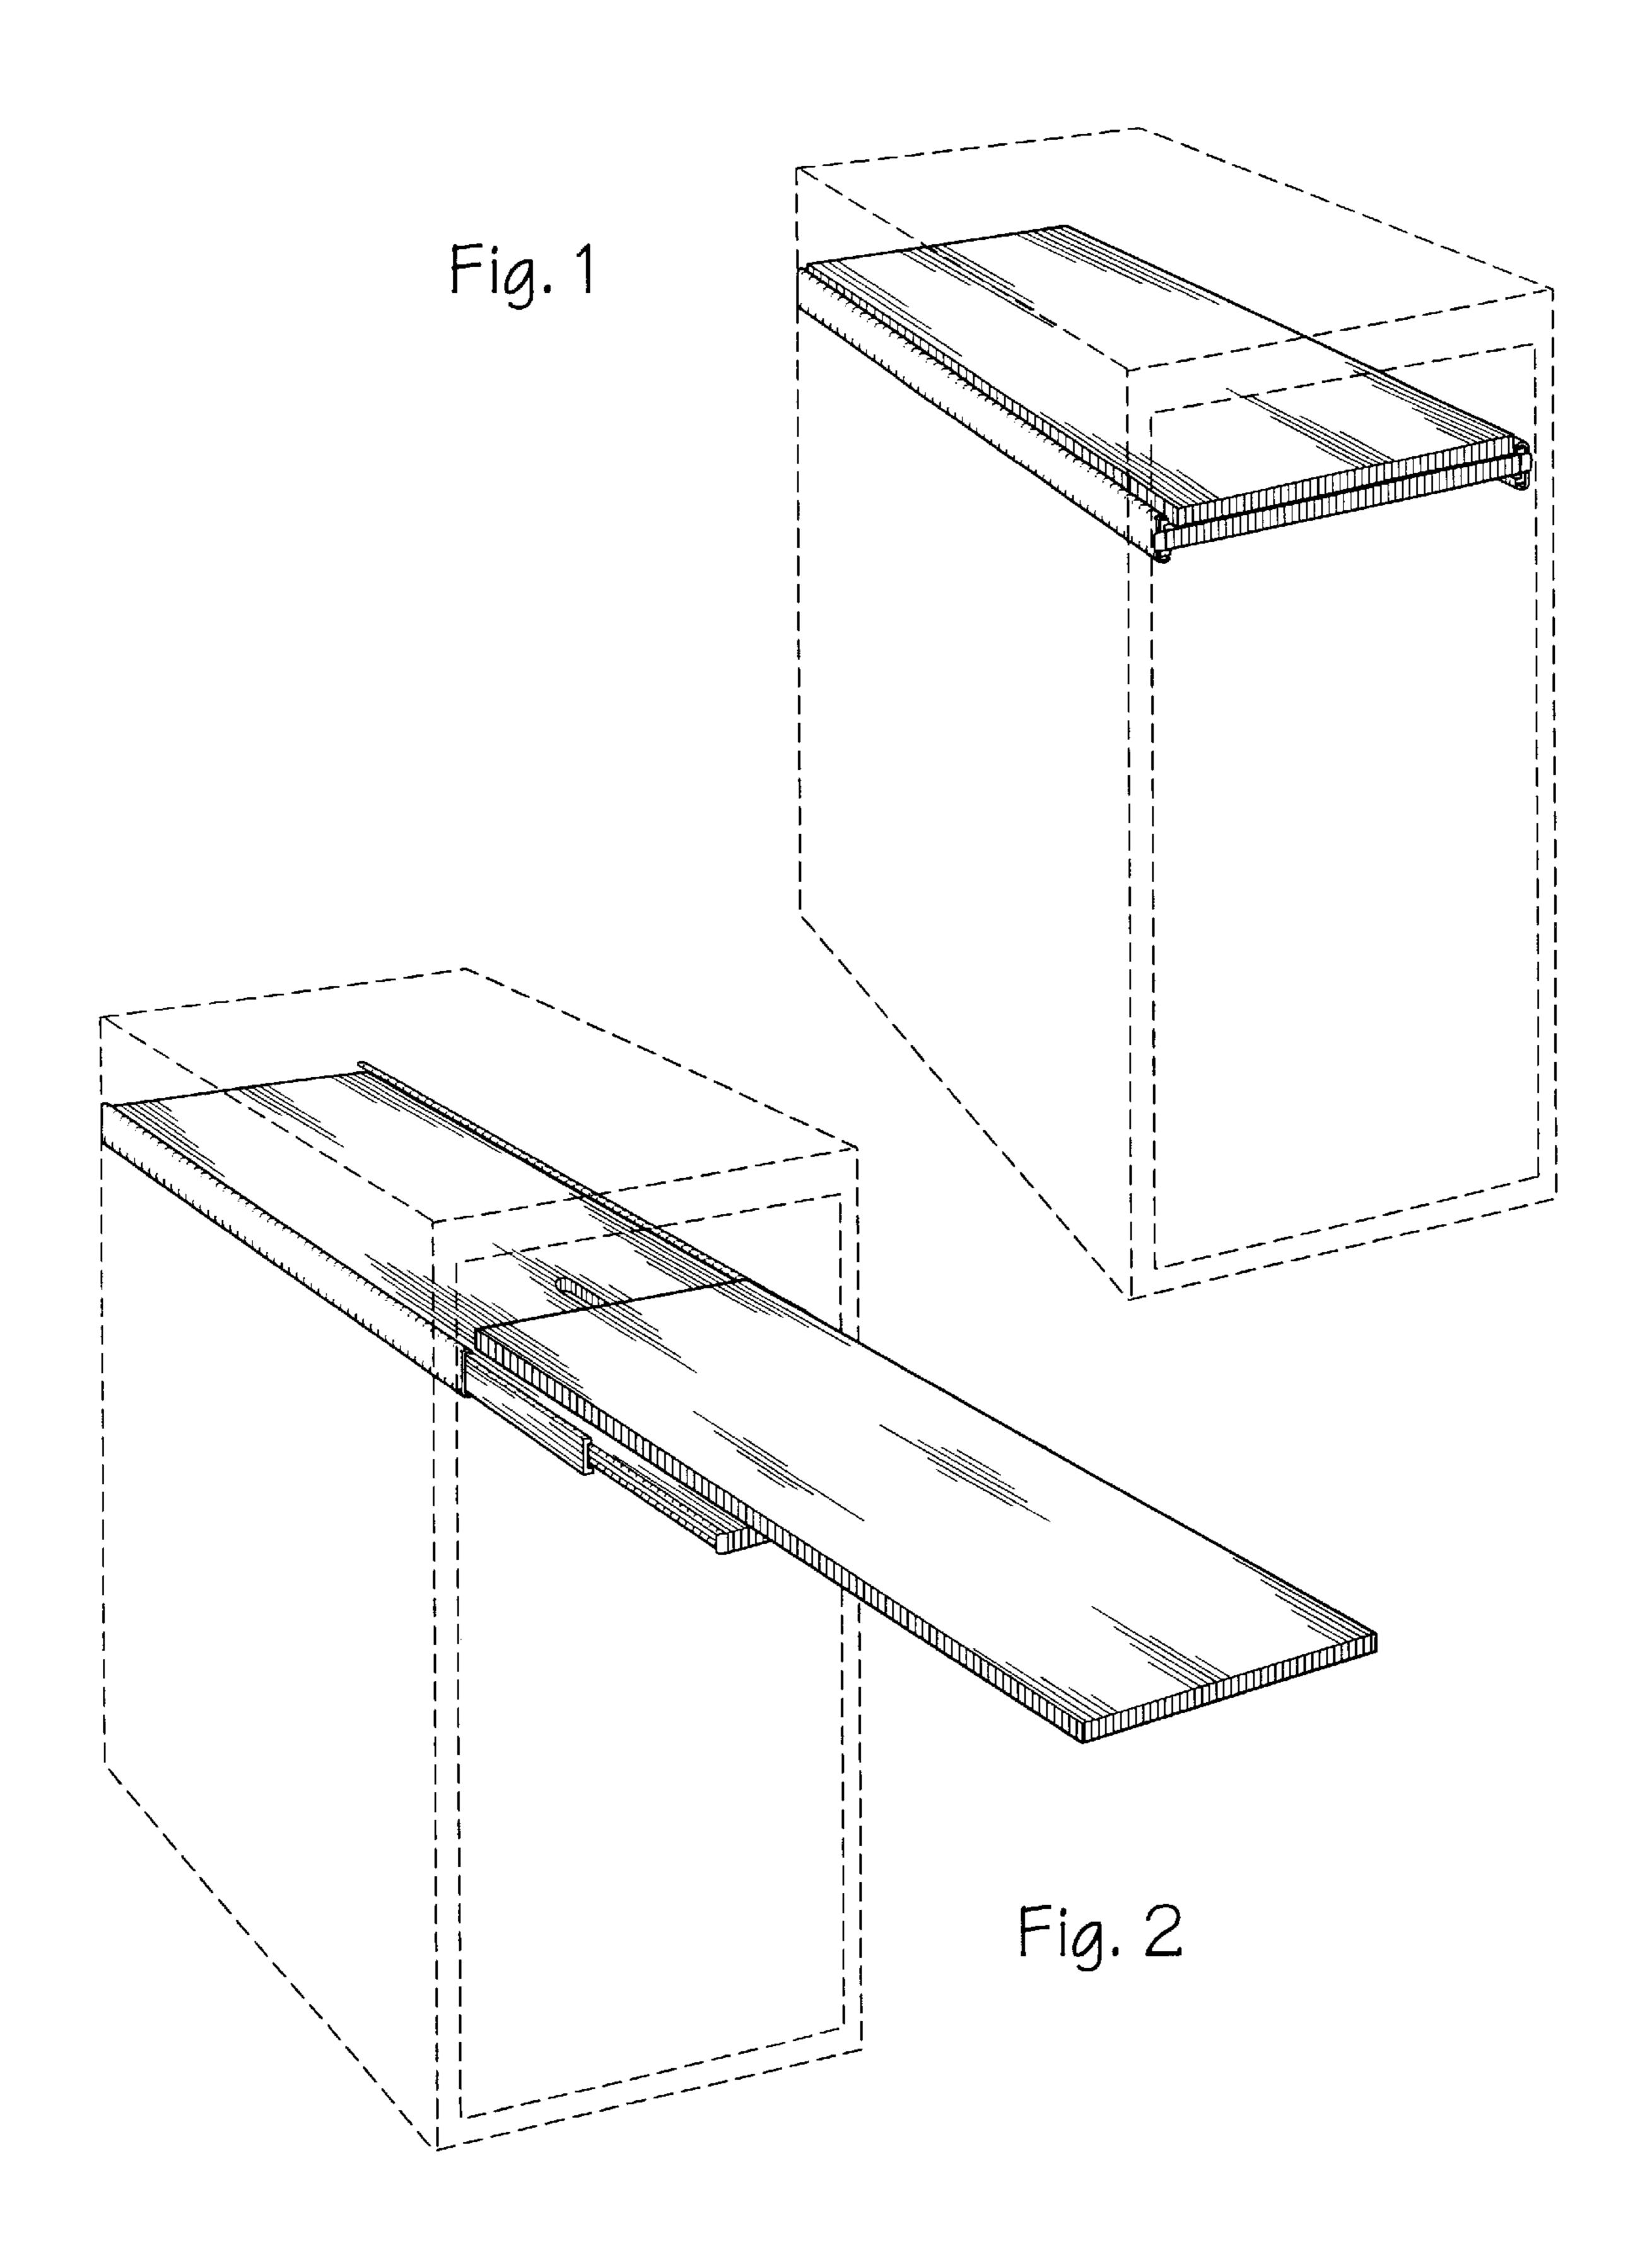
is a left, front perspective view thereof, the keyboard tray assembly in a pulled out position, the broken line drawing of a housing is for illustrative purposes only and forms no part of the claimed design, the right, front perspective view is a mirror image; and,
